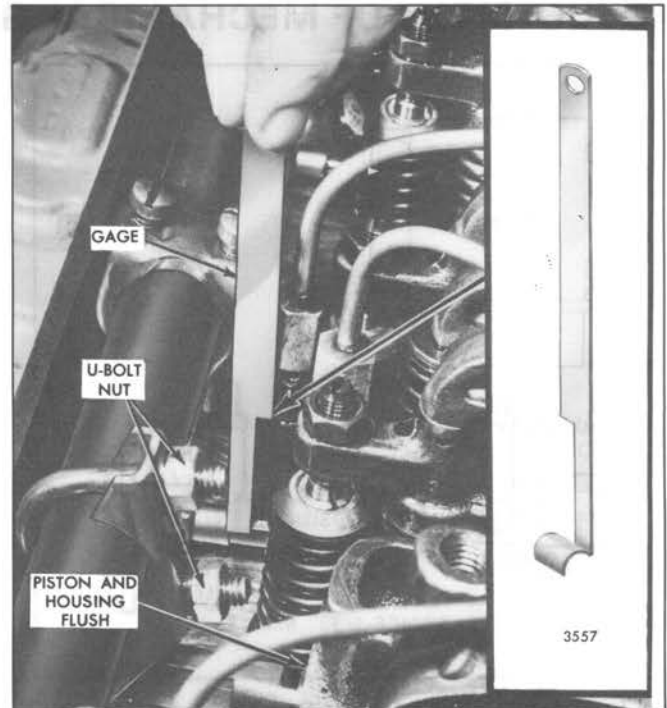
Adjusting Throttle Delay Cylinder (Former)
